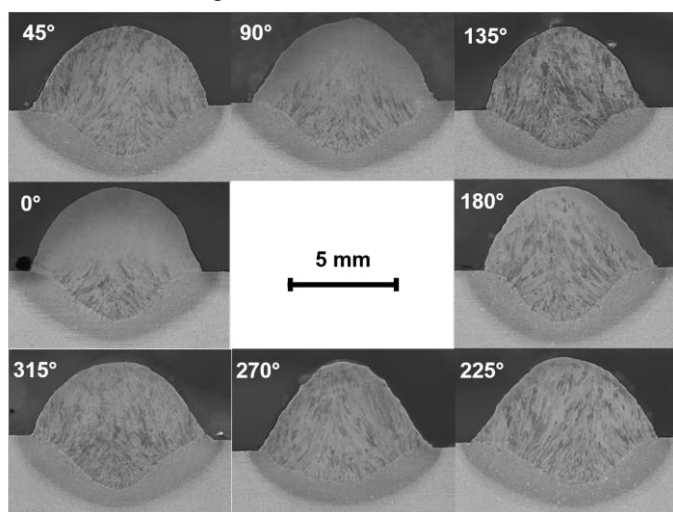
Cross-sections of the welded beads at the different welding directions
